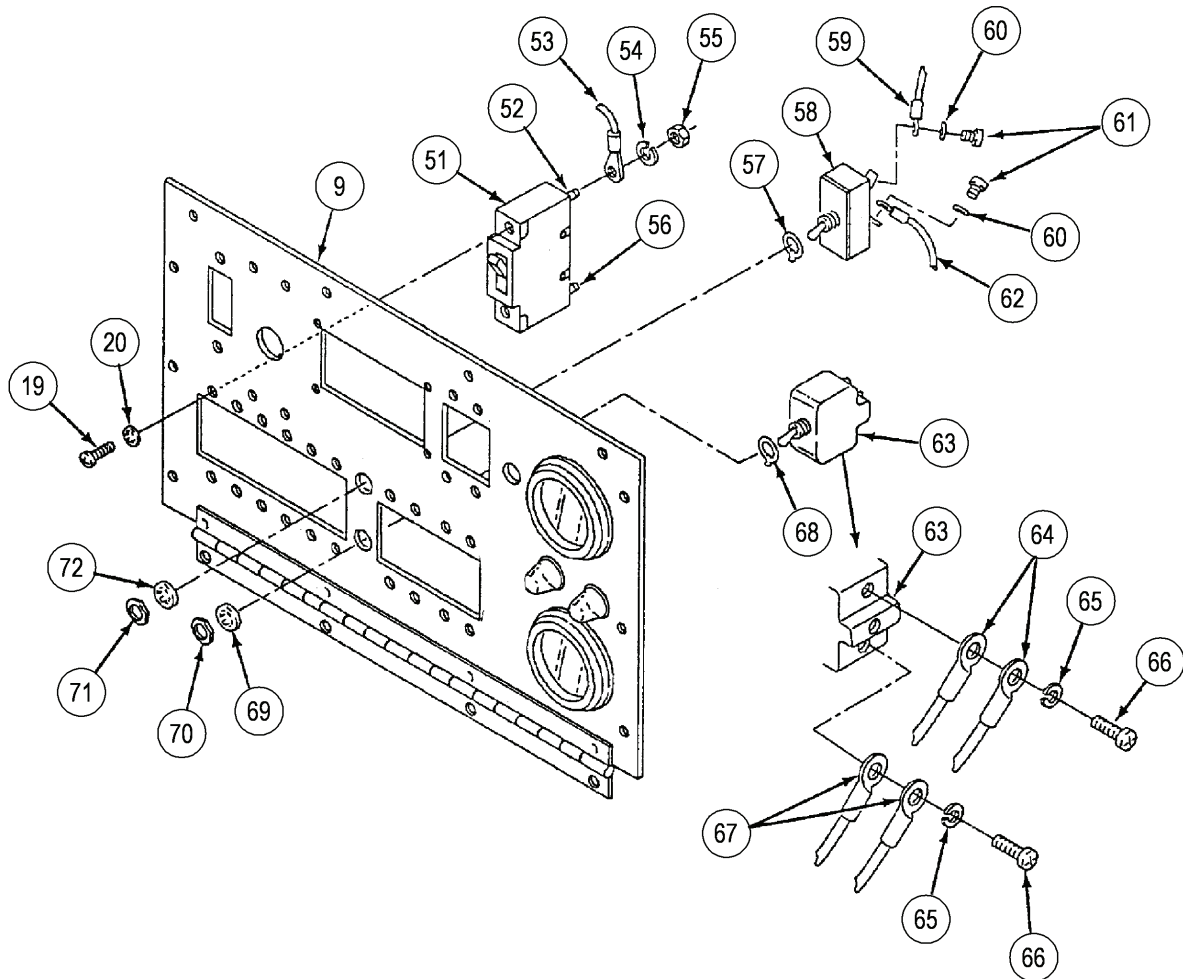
Faceplate Circuit Breaker CB17/Toggle Switch S1 Disassembly
